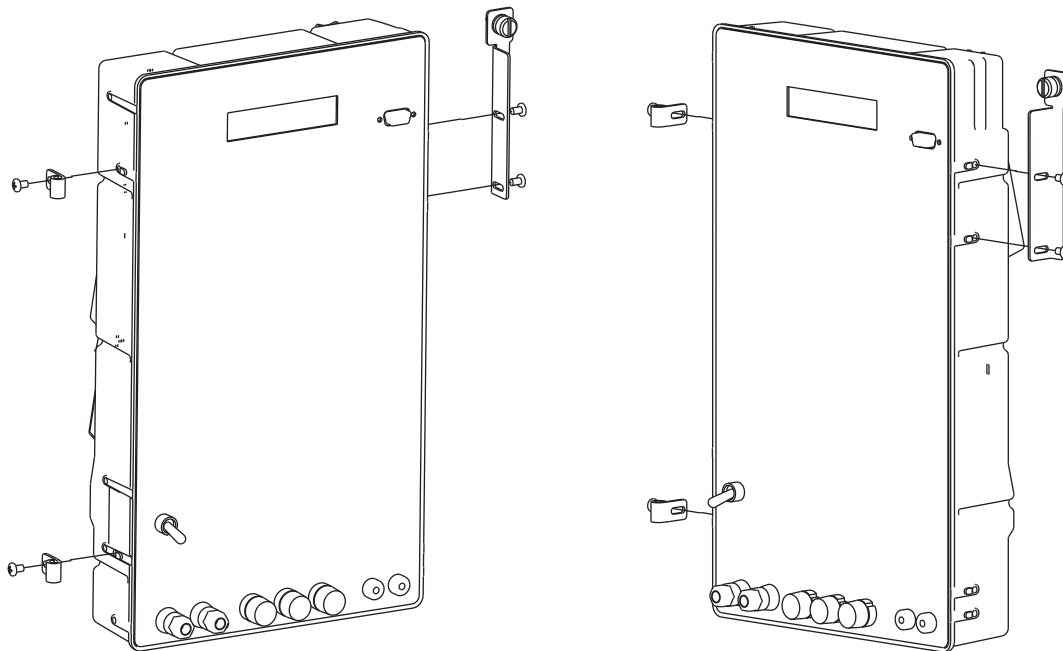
Attach Hinges and Latch to the SEL-2431 for Mounting in a Howard Voltage Regulator Enclosure
